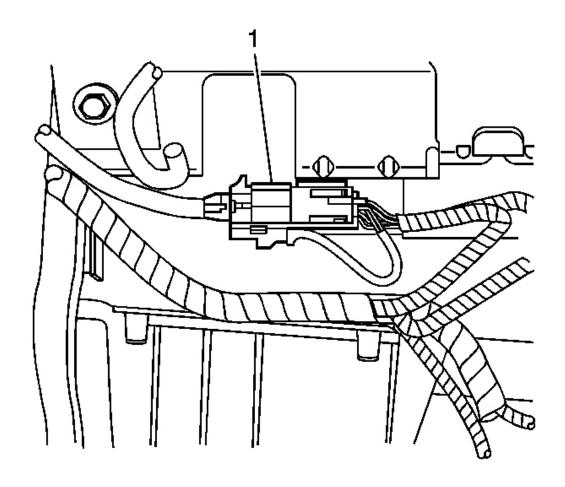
Locating IP Module 4-Way Yellow Connector Behind IP Support Courtesy of GENERAL MOTORS CORP.
